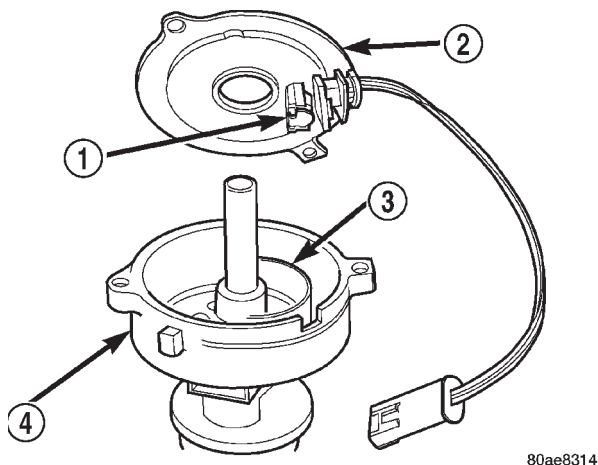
Distributor and Camshaft Position Sensor—2.5L Engine
